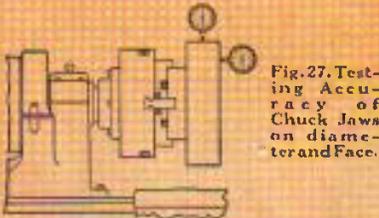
Testing Accuracy of Chuck Jaws on diameter and Face.
